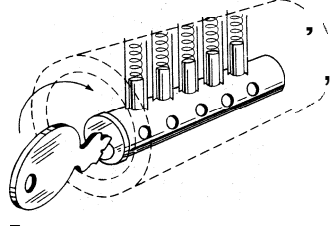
PIN TUMBLER CYLINDER IN UNLOCKING POSITION
